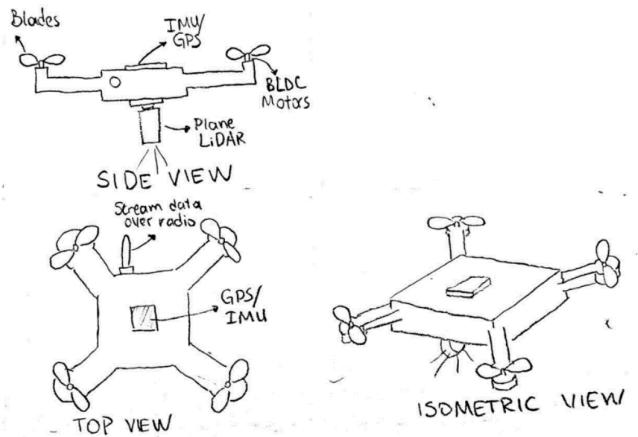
Drone Mounted LIDAR Isometric Drawing
